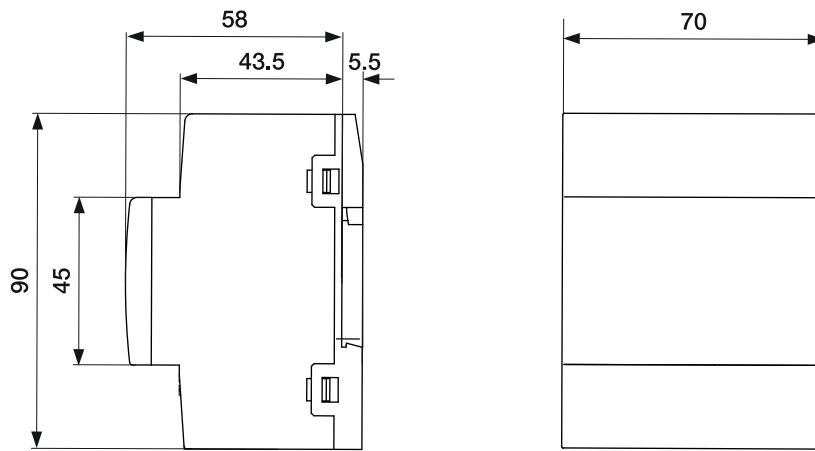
Dimensional drawing (all dimensions are in millimeters)
